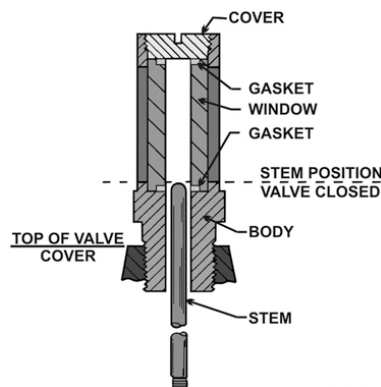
Valve position indicator (VPI). (By courtesy of Cla-Val Co.)
